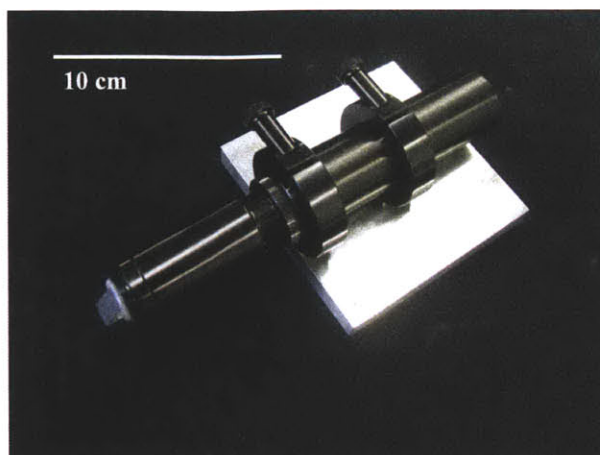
Assembled focusing optics, mounted on a base with a kinematic coupling.
